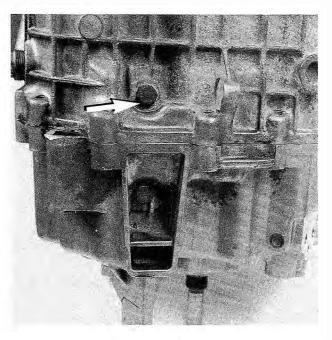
Reverse gear shaft retaining bolt (arrow) in front transmission case.
